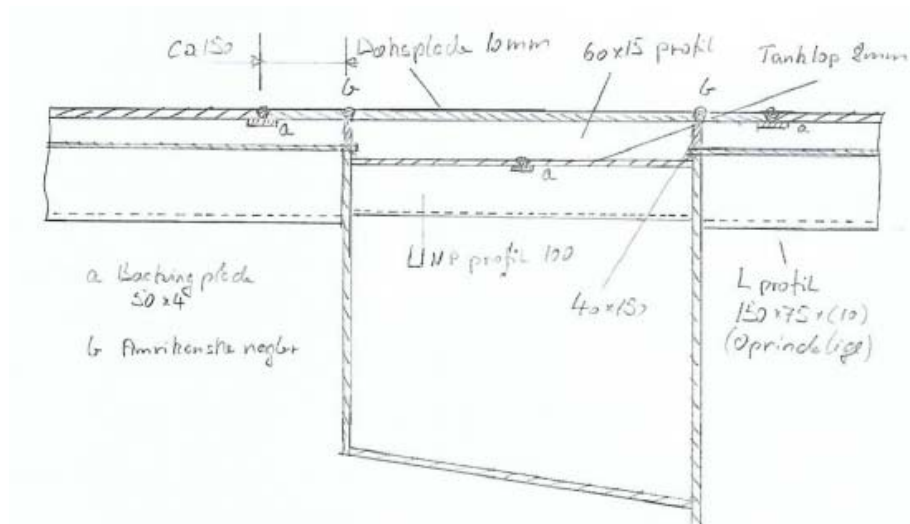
Modified deck structure in way of MDO tank (Udsiftning af MDO tanktop, Februar 2020)
